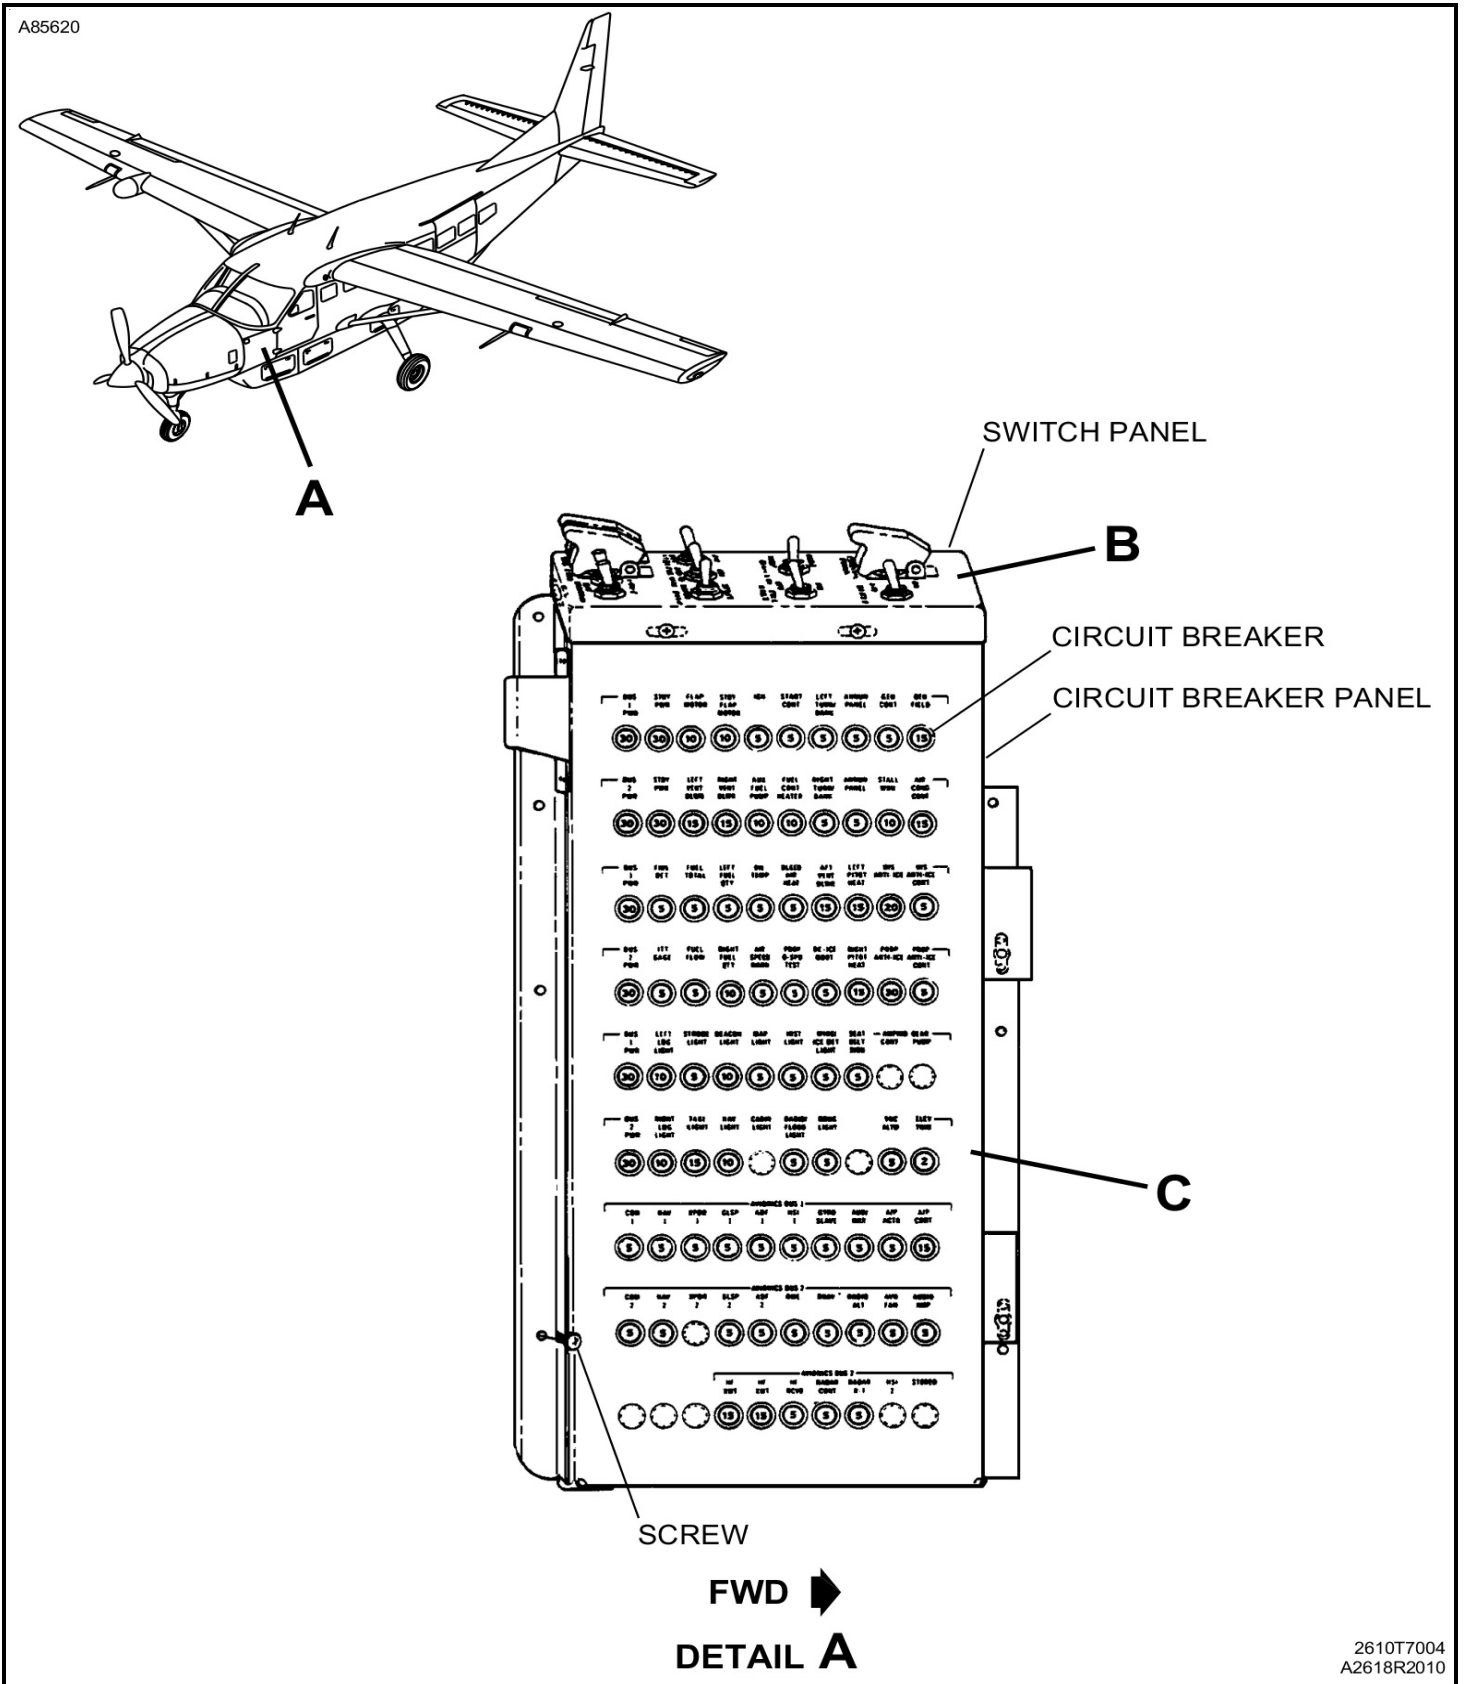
Sheet 2 : Left Circuit Breaker Panel Assembly LED Panels
